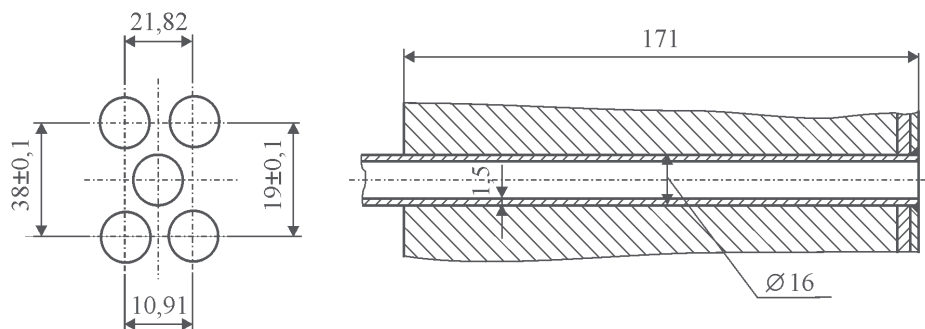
The scheme of inlet holes placement on the inner surface of collector (left) and heat exchanger tube mounted in collector wall (right).
